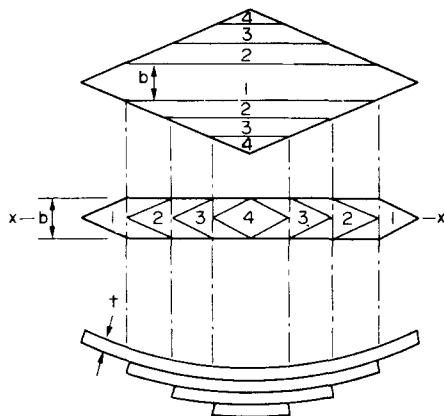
Semi-elliptic carriage spring showing initial pre-forming.
